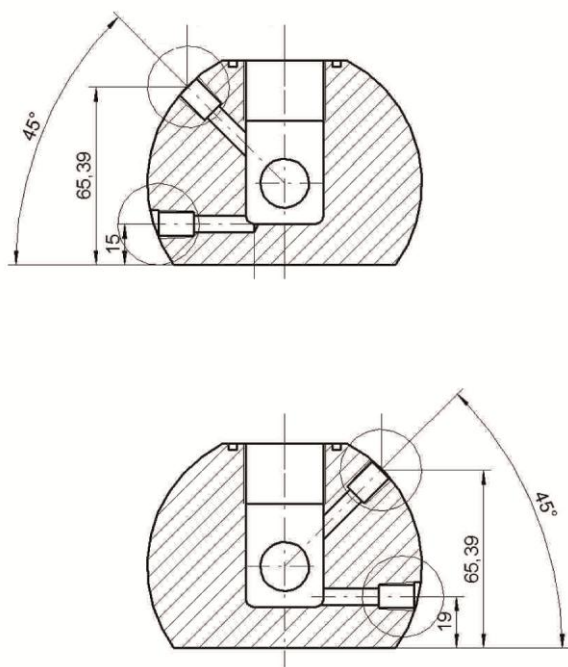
Cross-sectional drawing of the modified stainless steel body including drill holes for outlet, spectroscopic probes and liquid/solid inlet
